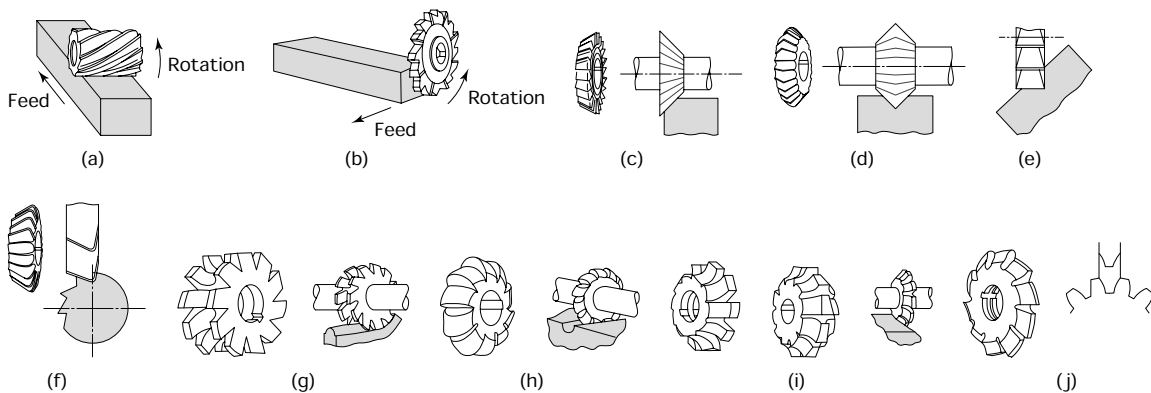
Horizontal milling machine cutters and the surfaces they produce: (a) slab milling cutter (cylinder mill); (b) side and face cutter; (c) single-angle cutter; (d) double equal-angle cutter; (e) cutting a V-slot with a side and face mill; (f) double unequal-angle cutter; (g) concave cutter; (h) convex cutter; (i) single and double corner rounding cutters; (j) involute gear tooth cutter
